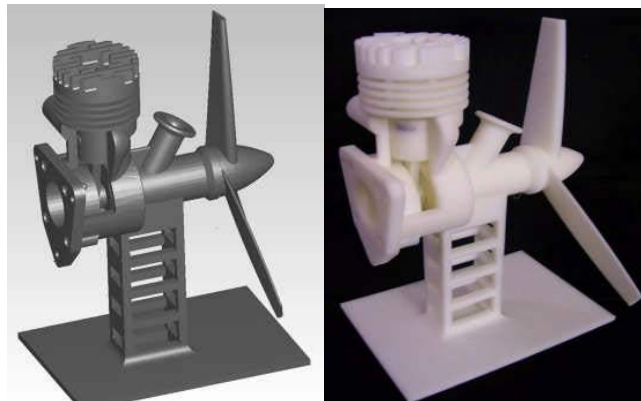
Physical prototype of the single-piston engine model: (a) Original STL, and (b) Physical prototype.
